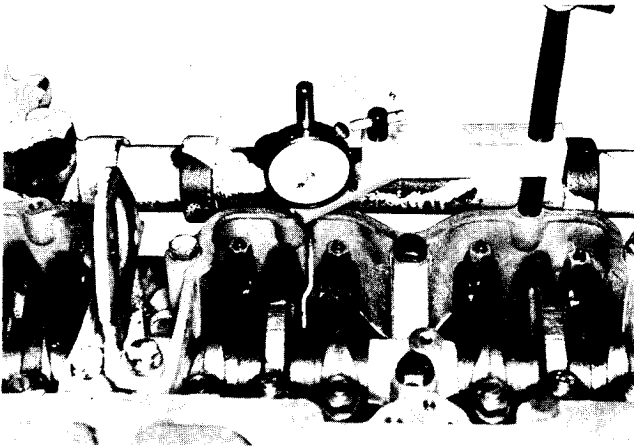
, (N114231). Dial indicator in place — extension in contact with plunger — N-855
